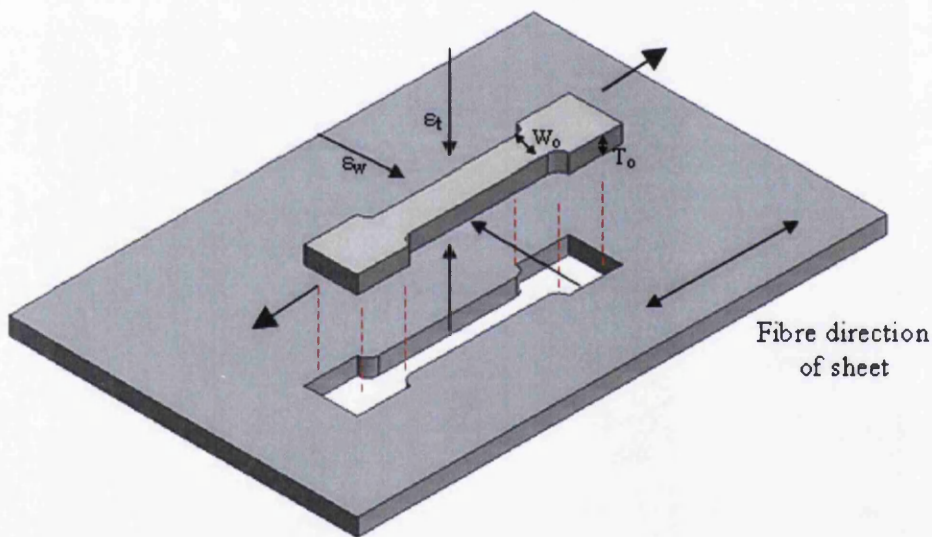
An illustration of a tensile test specimen that has been cut parallel to the strip rolling direction.
